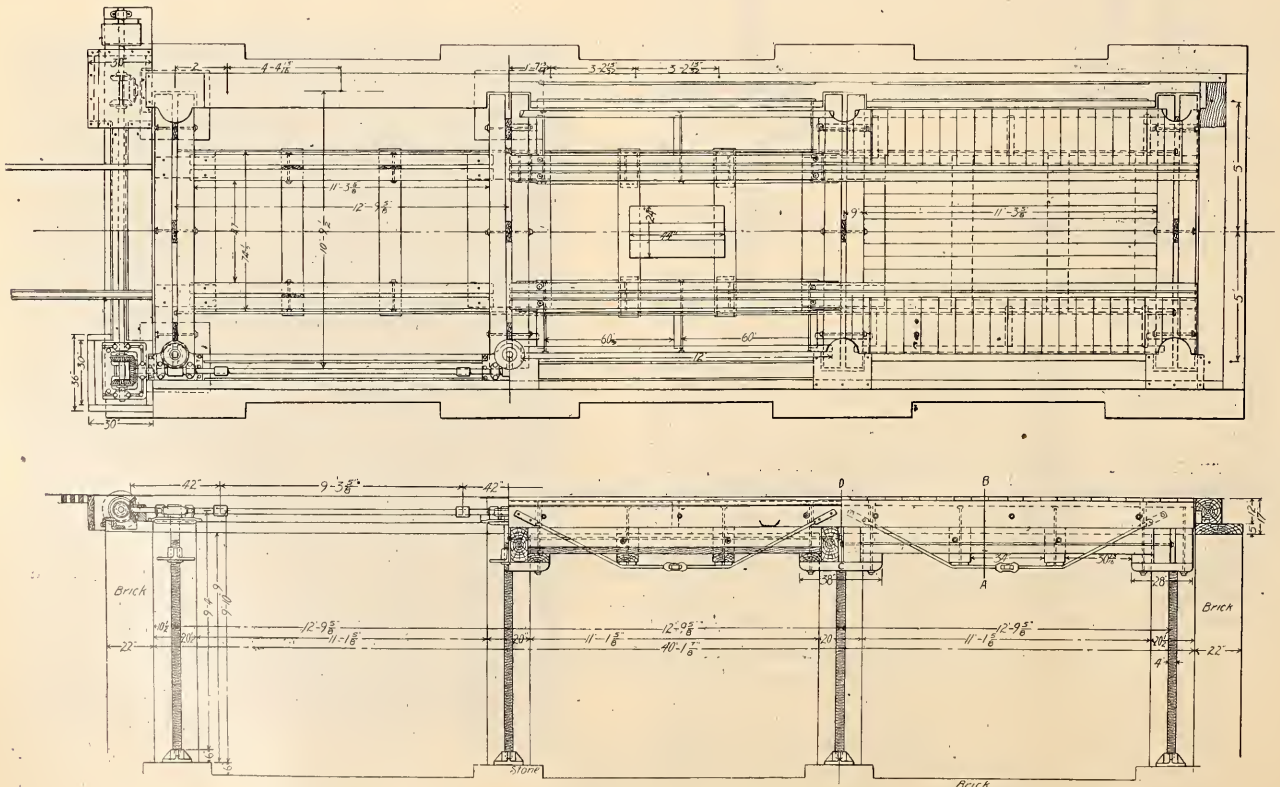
DRIVING WHEEL DROP TABLE, PLAN VIEW AND SECTIONAL ELEVATION—SOUTHERN RY.
